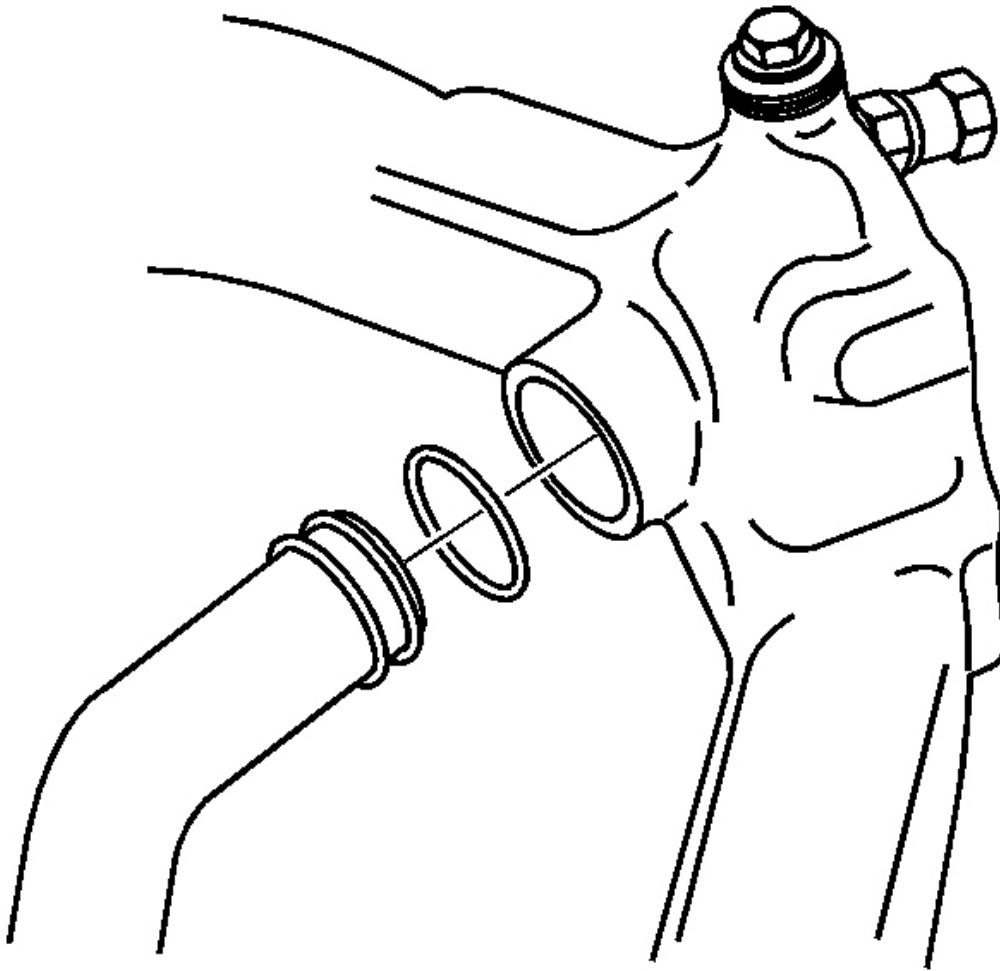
View Of Turbocharger Coolant Feed Pipe, Bracket & Bolts
